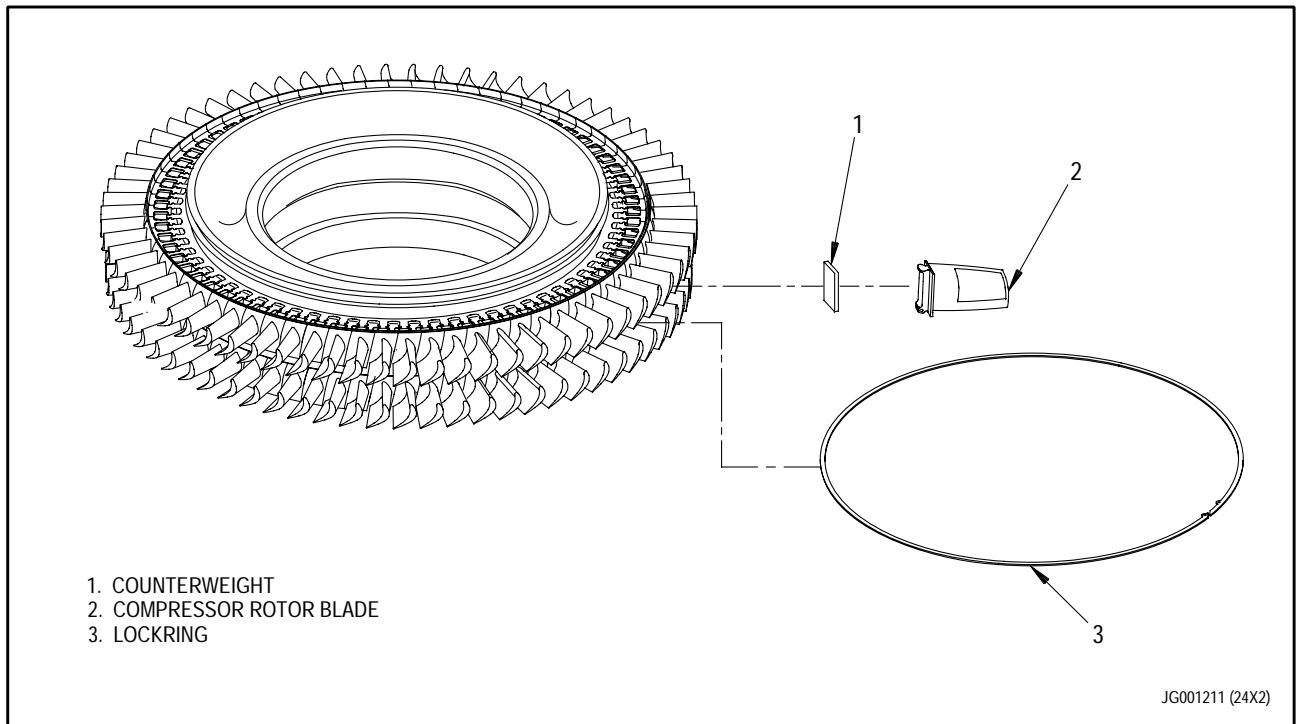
Fourth and Fifth Stage Compressor Rotor Blades - Removal (Typical)
